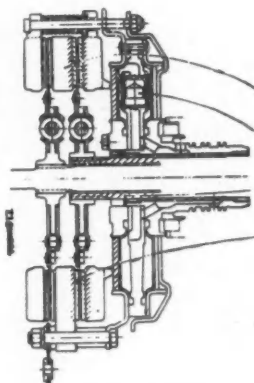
Sectional view of double clutch designed for use ahead of an automatic transmission having two input members.
